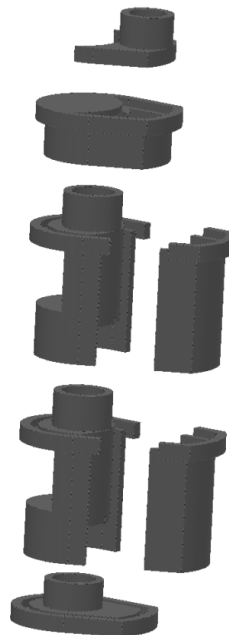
Exploded view of mold for capsulation for a finger actuator
